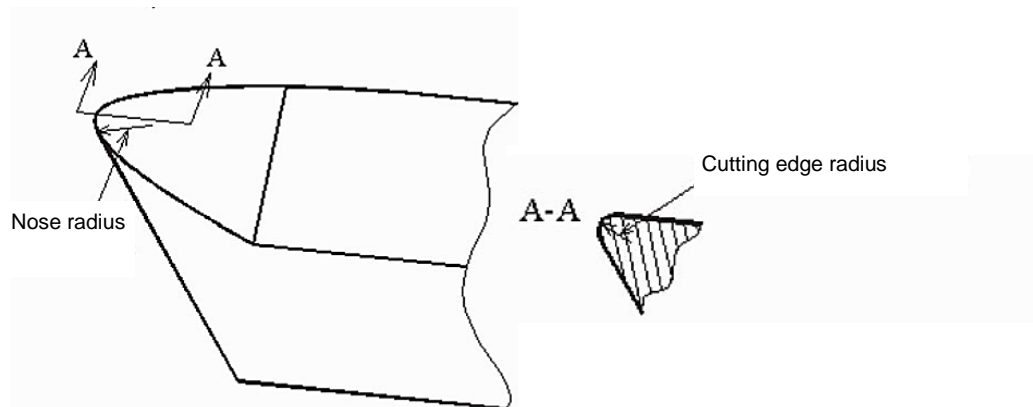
Nose radius and cutting edge radius of tool [73]
